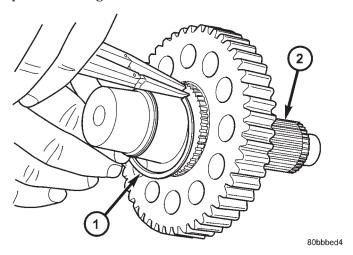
Remove Front Output Shaft Drive Gear Snap-ring
